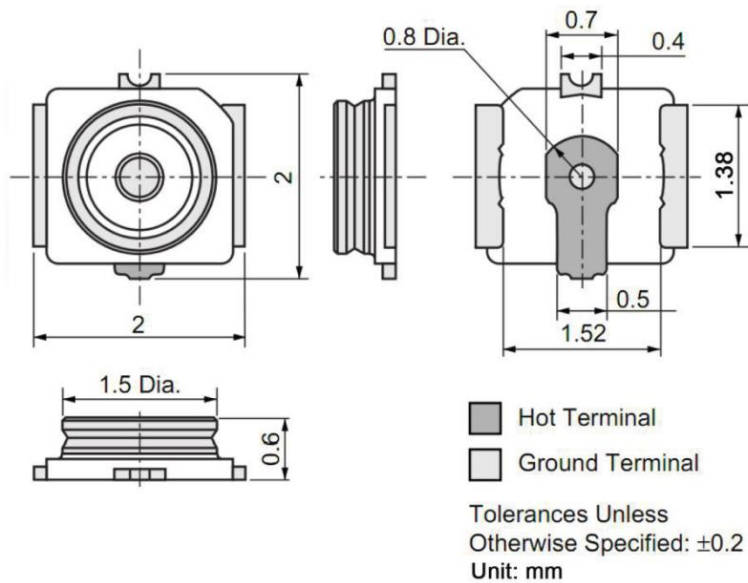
EM120R-GL&EM160R-GL RF Connector Dimensions (Unit: mm)
